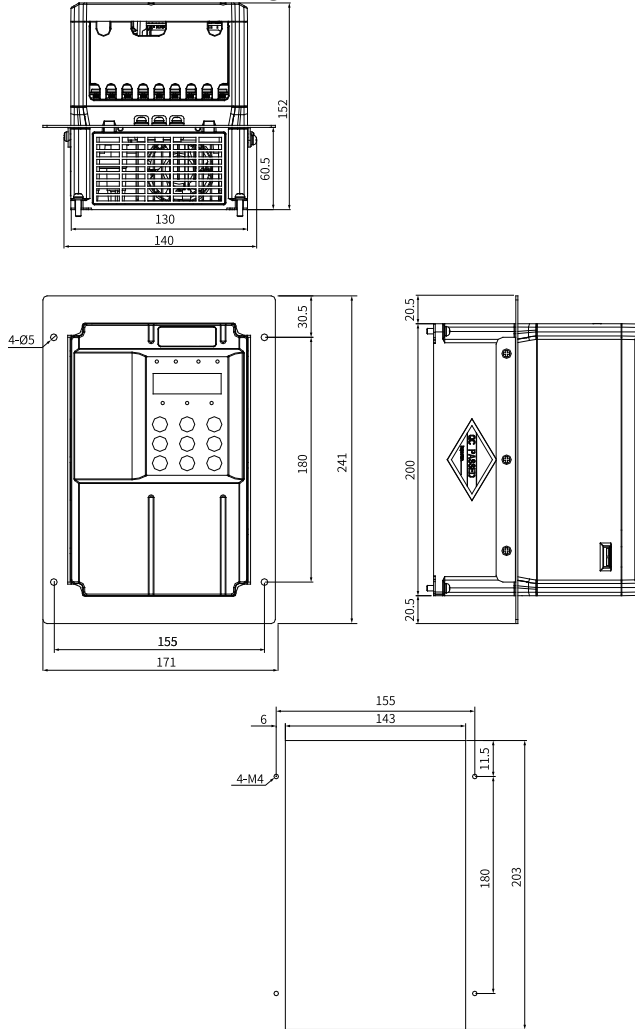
Dimensions of the MD500-AZJ-A1T1 bracket and mounting hole
